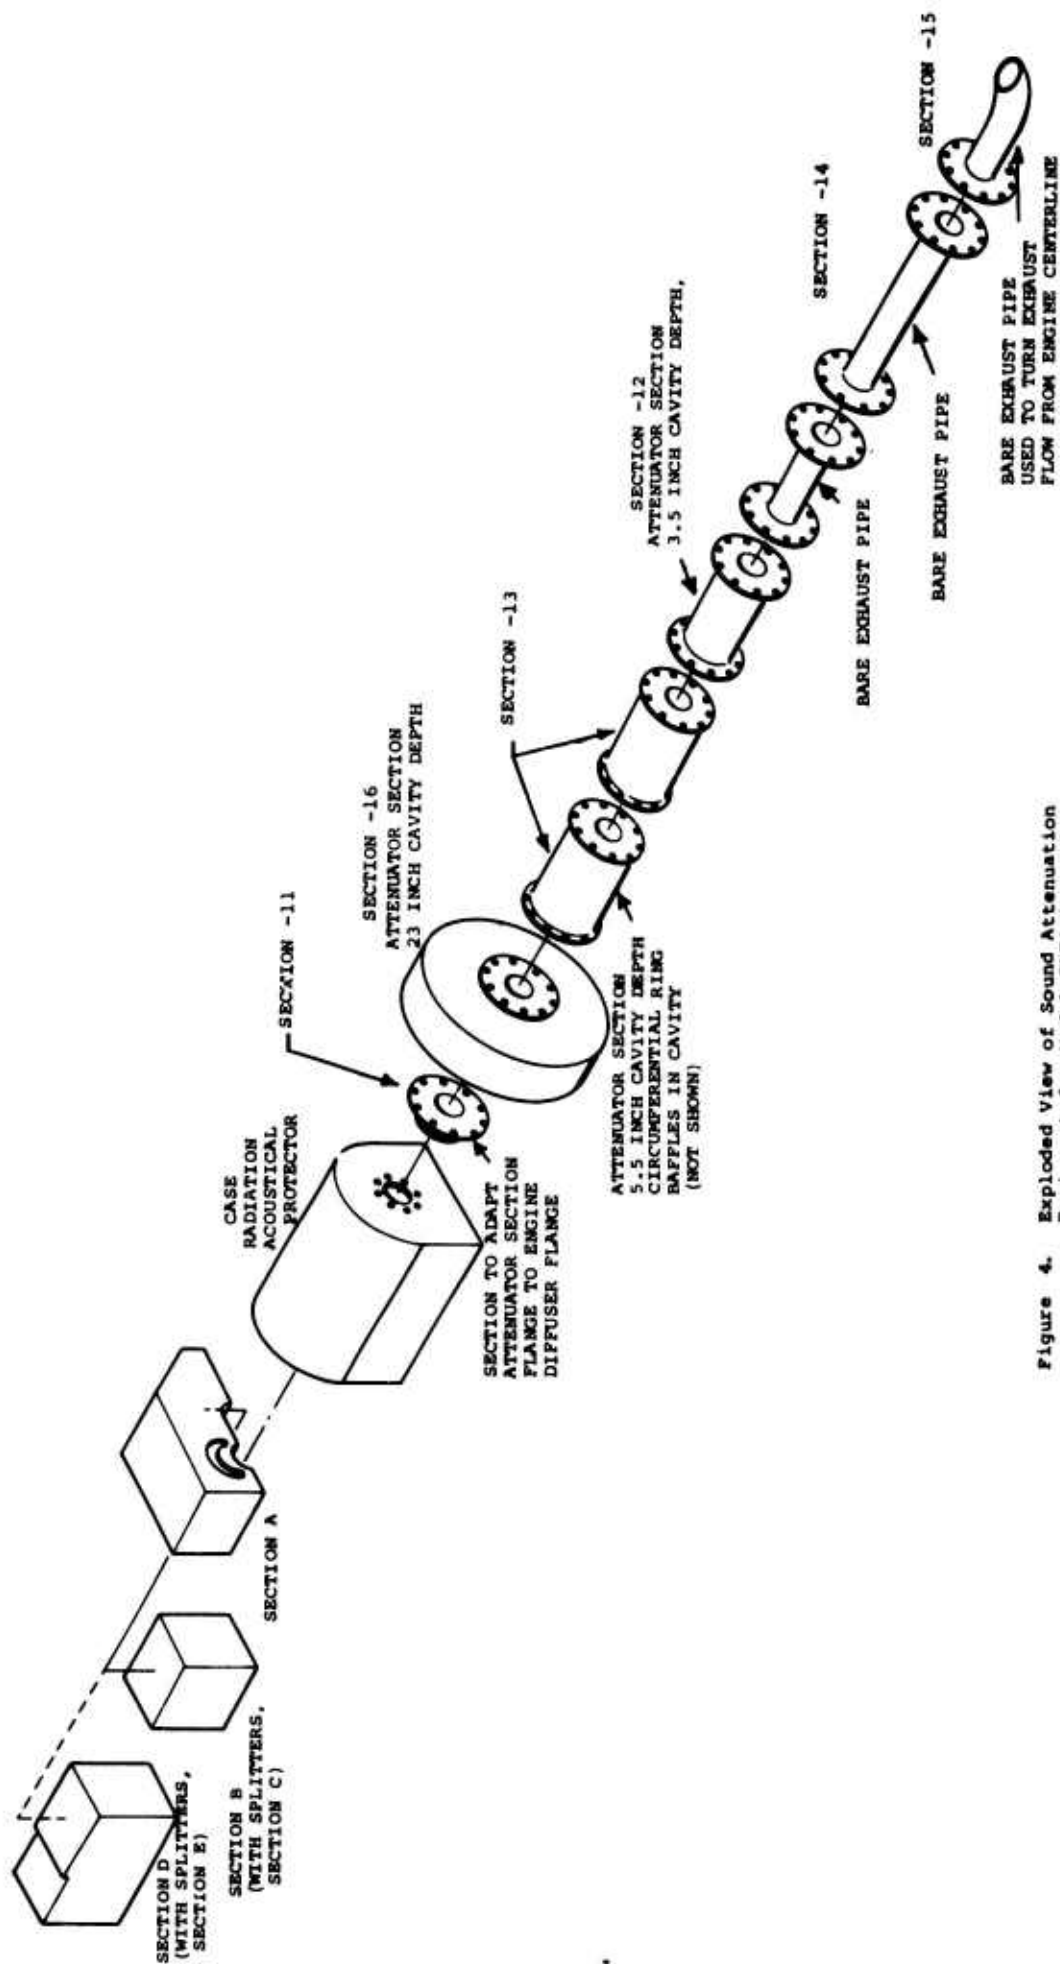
Exploded View of Sound Attenuation Equipment for Model TP331-5-251 Turboprop Engine.
